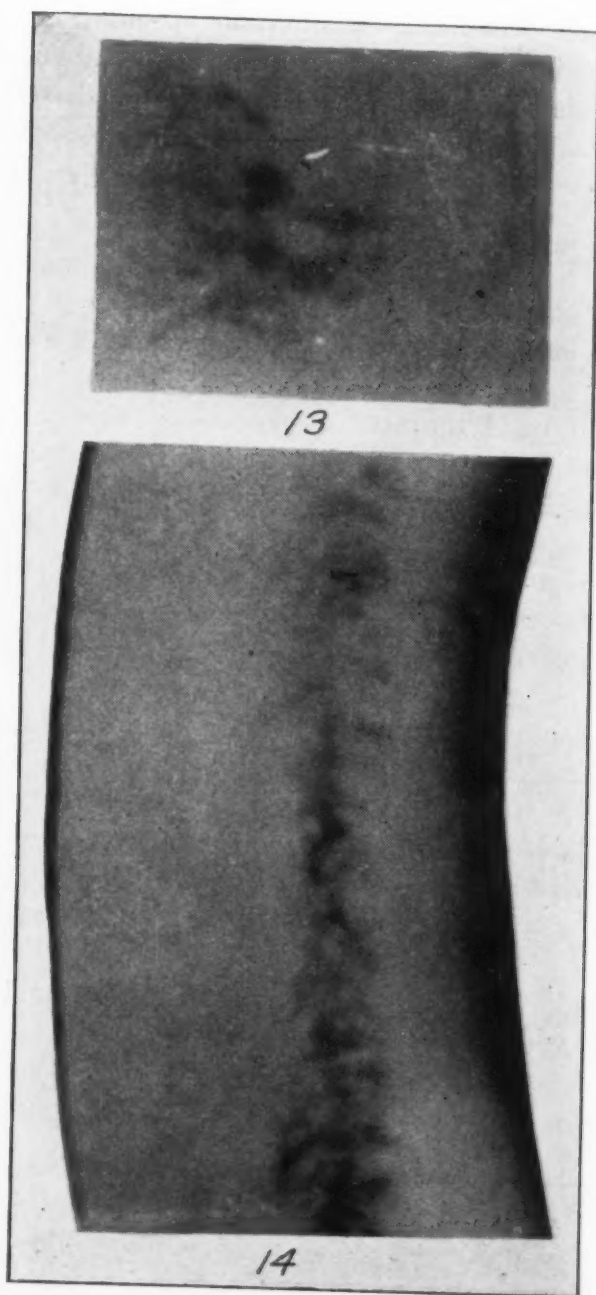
Radiograph of Steel Casting Showing Slag Inclusions. Fig. 14—Radiograph of Steel Casting Showing Fillet Pipe.
